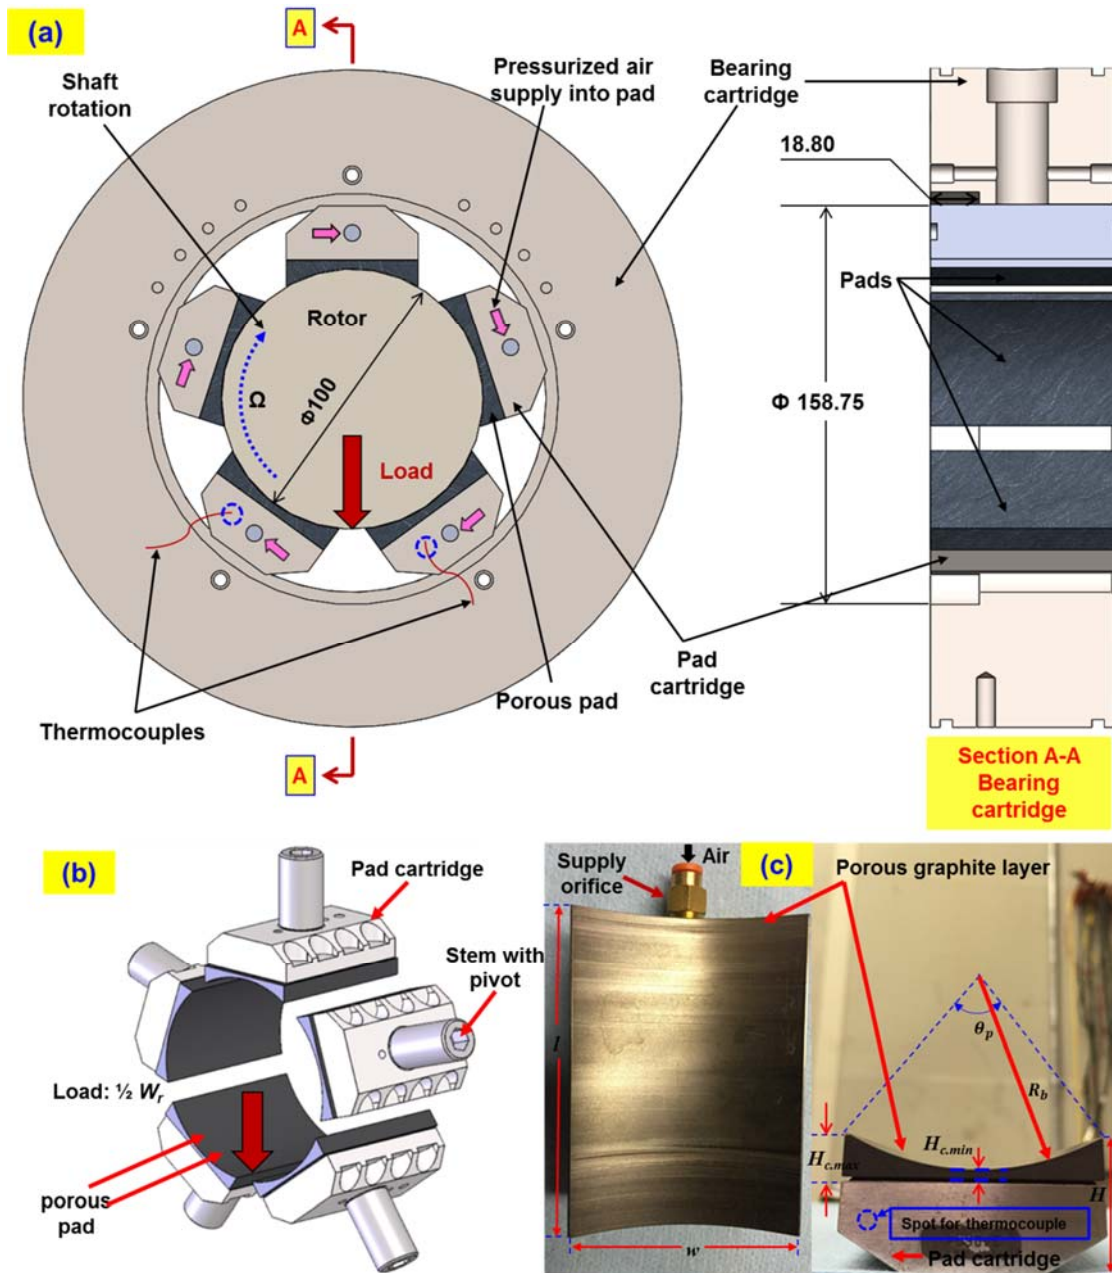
Photographs of a 5-pad porous type tilting-pad bearing including (a) schematic view of a bearing installed in its cartridge, (b) isometric view of a bearing and (c) top and side views of a bearing pad. $t_{max} = 9.1$ mm, $t_{min} = 2.2$ mm.
